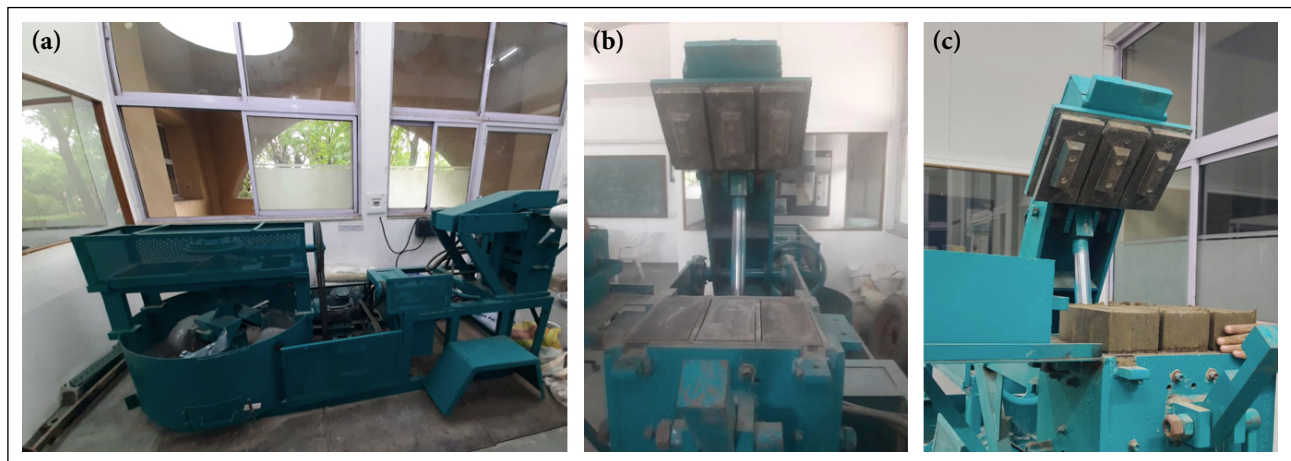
(a) Hydraulic brick-making machine. (a) Hydraulic compressor. (c) Production of brick.
